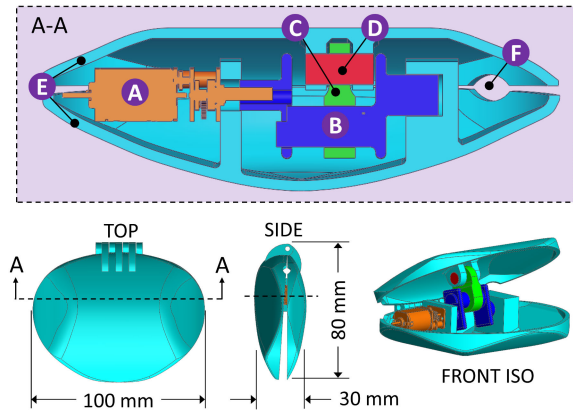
Mechanical overview of RoboScallop prototype. A 3D CAD model of the robot is shown in different views with a cross section through A-A depicting the critical components of the internal mechanism of the robot: A-motor, B-crankshaft, C-connecting arm, D-hinge pin, E-body shells, and F-intake/jet aperture. The front covering membrane is not shown.
